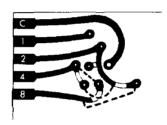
On the reverse side of the switch remove the sections indicated and install the three jumpers.
